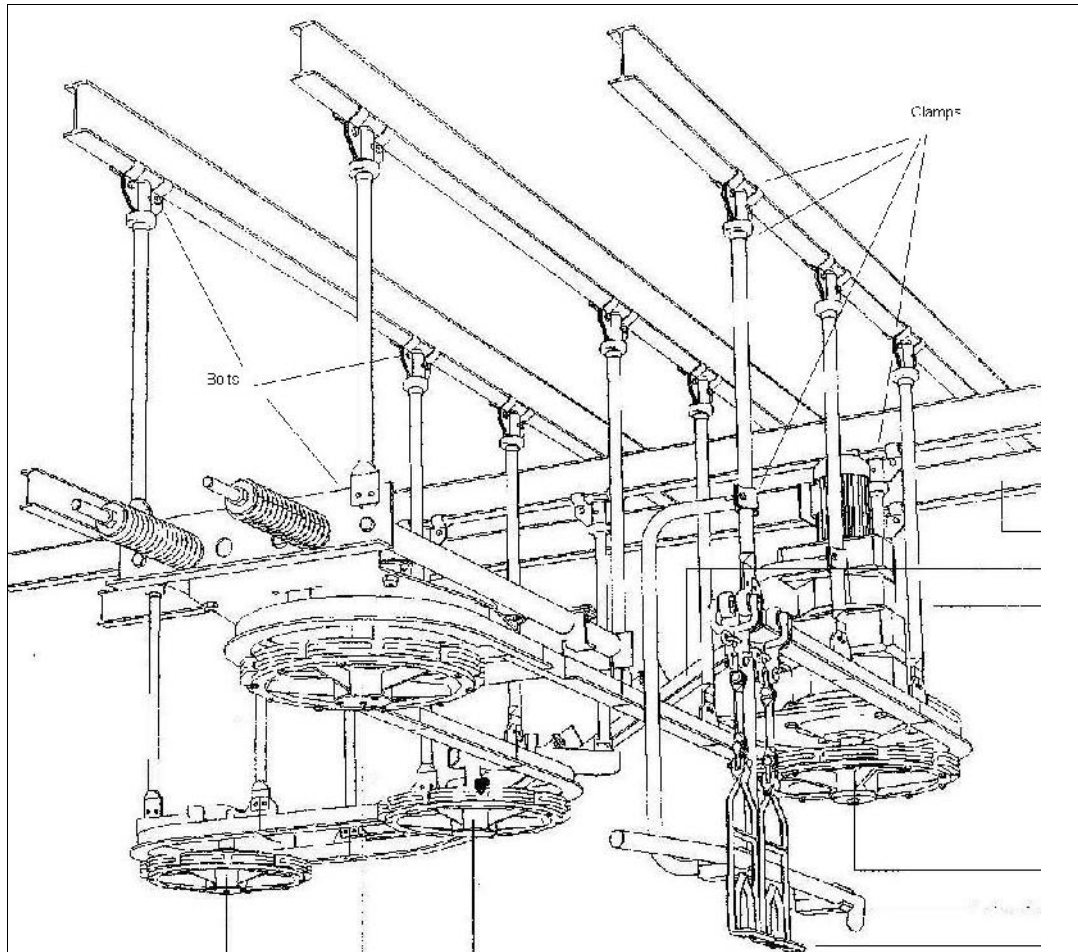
How Meyn Makes Use of Bolting for Assembly of Overhead Conveyor – Making Relocation and Reconfiguration Easy, Economical and Quick
